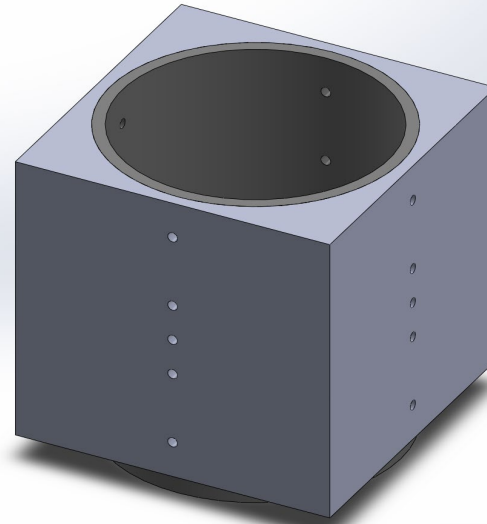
Isometric View of a coupler with a manufacturing jig
